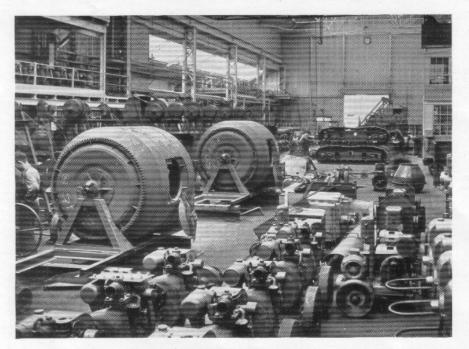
This erecting bay in the mixer and excavator shop is 57 ft, wide imes 220 ft, long.
